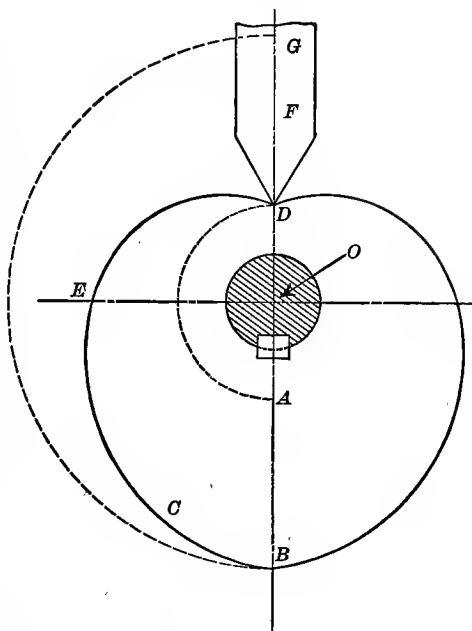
HEART CAM AND FOLLOWER, SLIDING CONTACT
